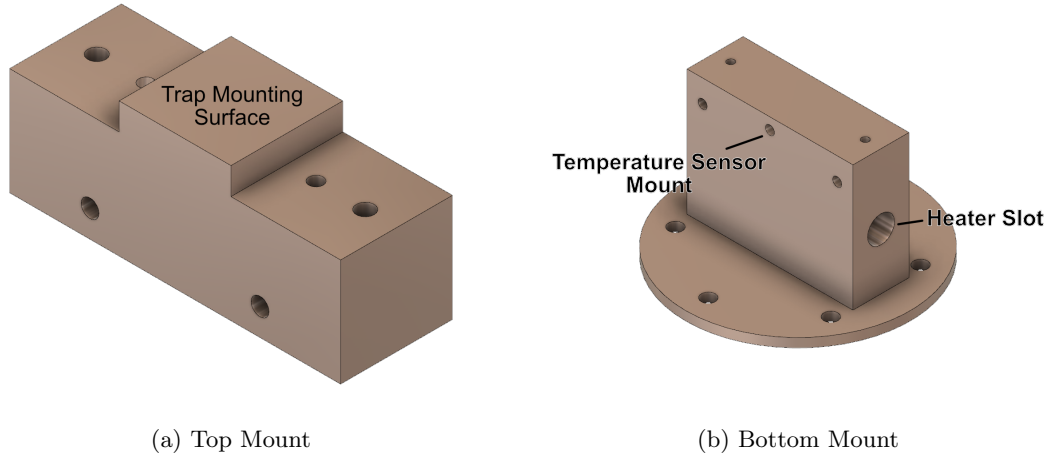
Design of the top chip mount (a) that is removable with two screws for fast chip swapping. The bottom chip mount (b) that is fixed with six screws into the cold edge. Both parts are made out of OFHC copper.
